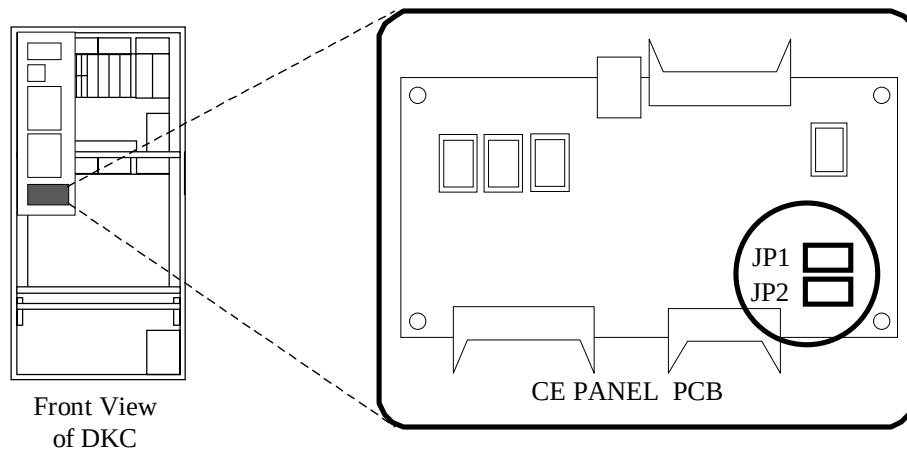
Installation of Jumper Plugs in CE PANEL PCB
